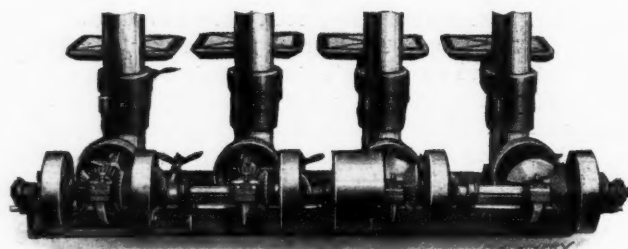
Countershaft on Silver Four-spindle Gang Drill
